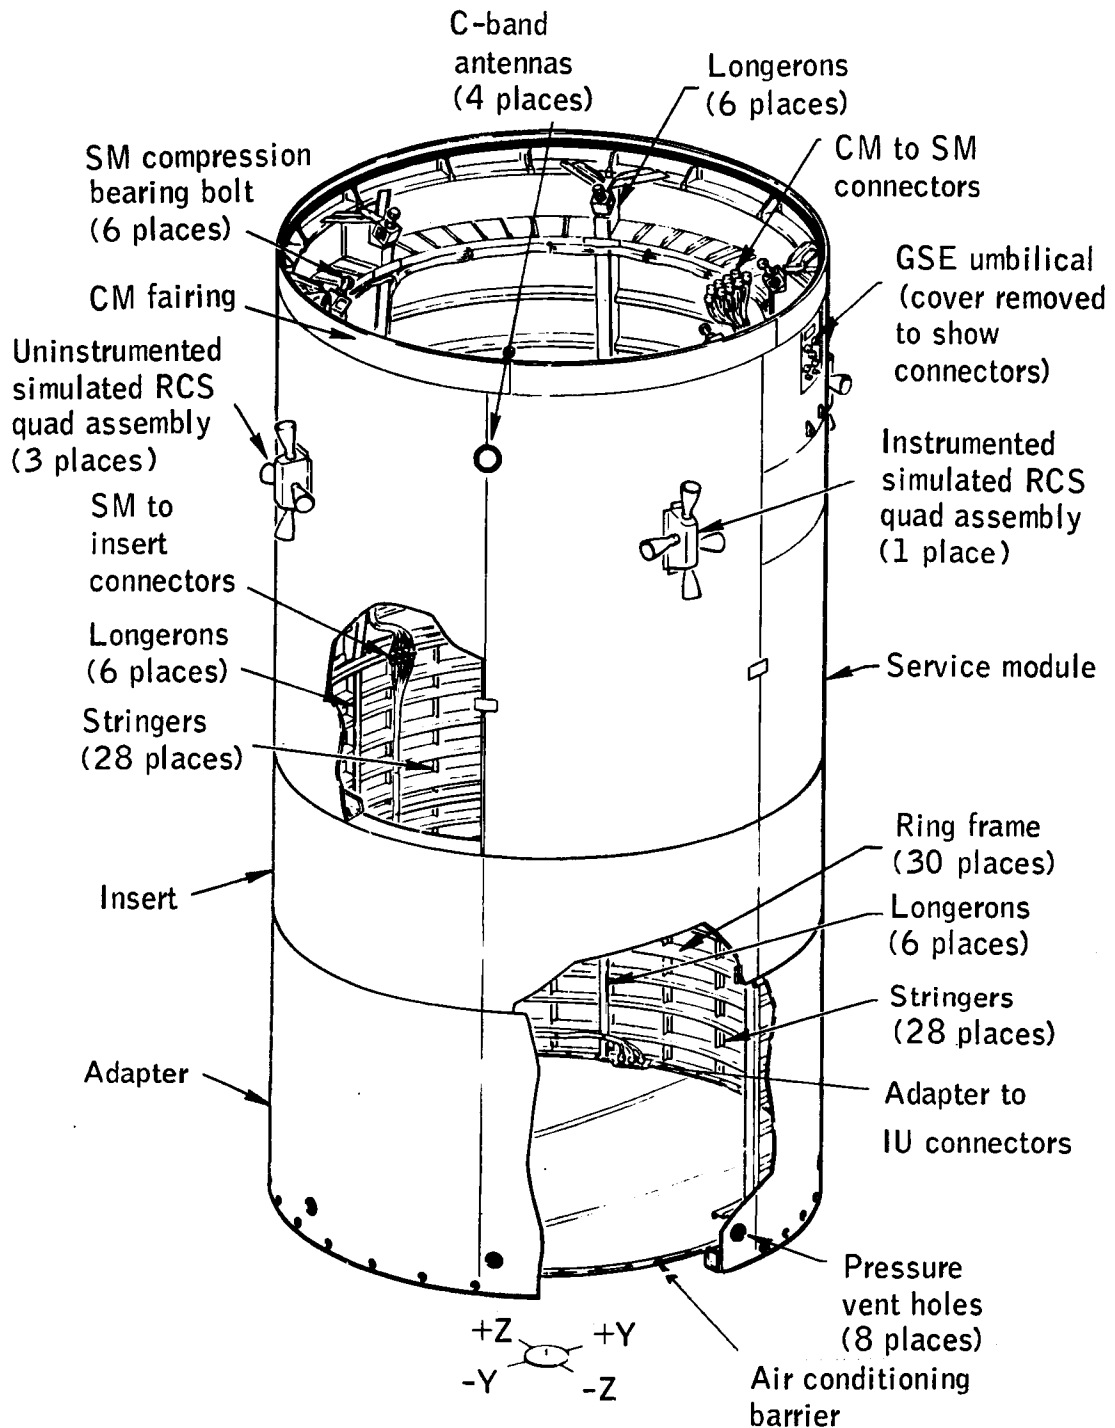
Cutaway view of BP-15 spacecraft service module, insert, and adapter.
